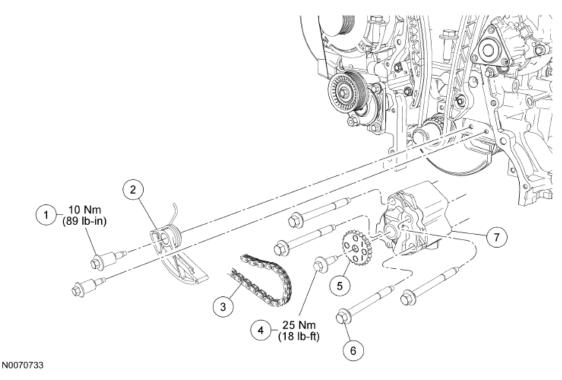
Identifying Oil Pump Courtesy of FORD MOTOR CO.
